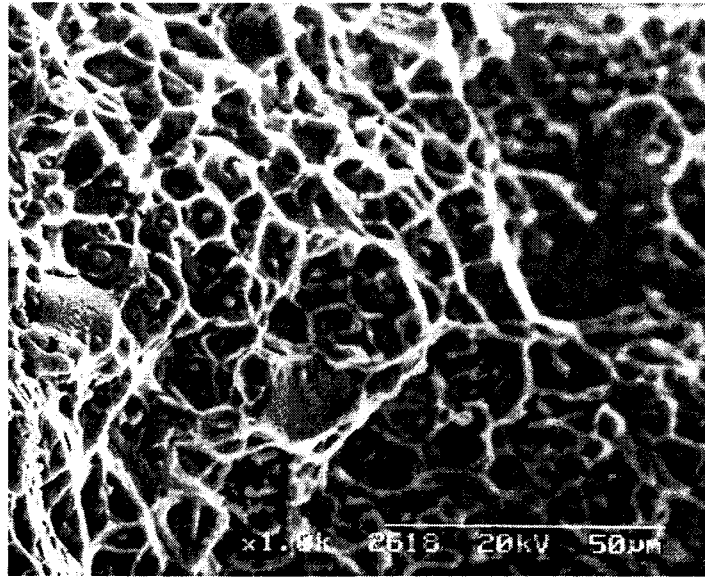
Al 2618 fracture surface at a magnification of 1000
